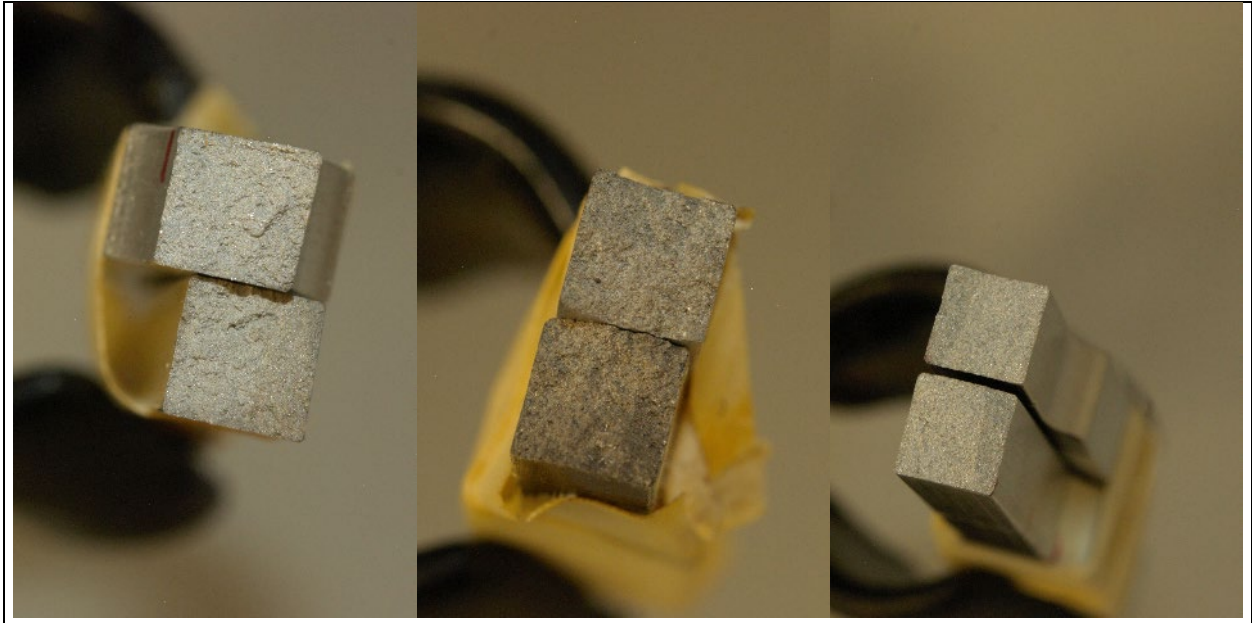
Fracture surfaces of cold spray Al 6061 tensile test specimens. Left: A, center: XY, right: Z. Fracture surfaces are relatively flat, indicating brittle fracture modes.
